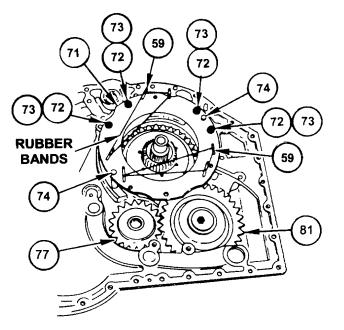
Right Hand Cover Assembly. INSTALL RIGHT BRAKE ASSEMBLY – Cont.
